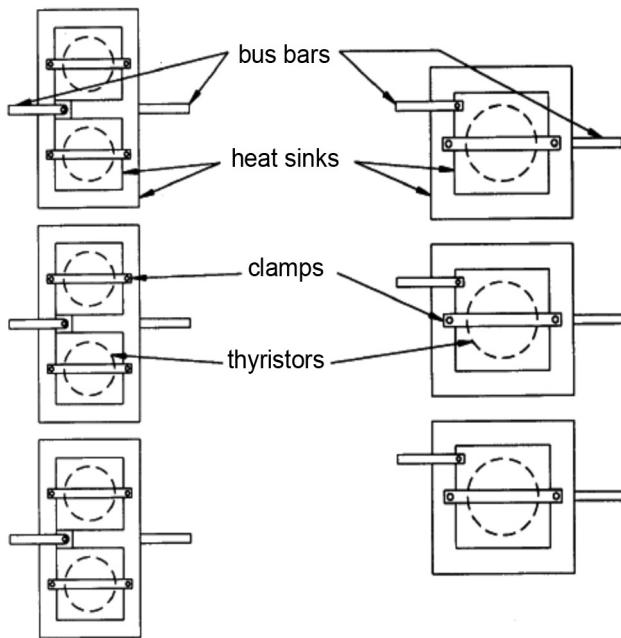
Comparison of three-phase soft starter assemblies using PCTs and BCTs. The left assembly is made of PCTs, and the right one is using BCTs. The BCT solution enables a reduction in the number of required mechanical parts and therefore in size.
